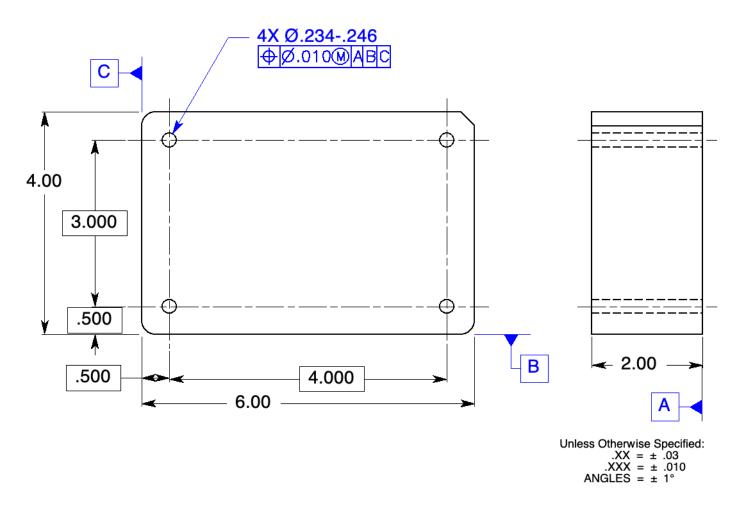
Tolerancing fixed fasteners: Prob. 1.
